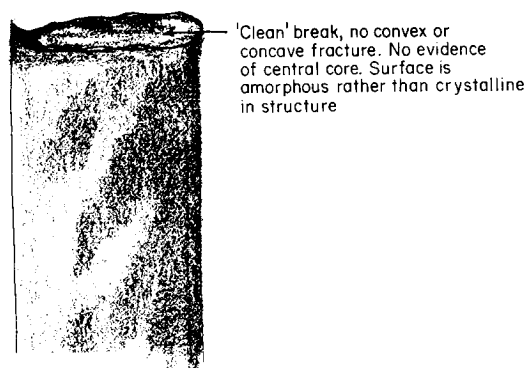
Ejectoret[®] moulded stick. Diagram of cross-section on breakage.
